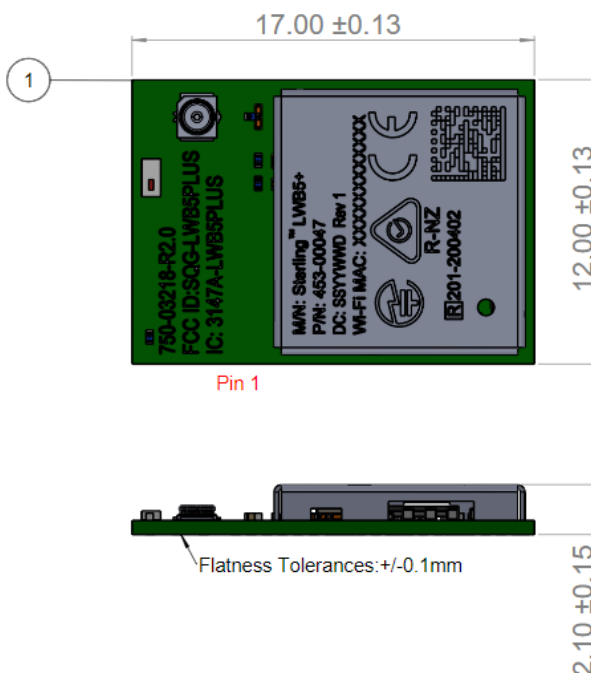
Module dimension of LWB5+ series wireless module – Top View
